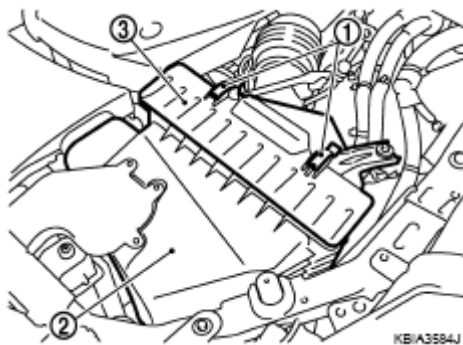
Identifying Clips, Holder And Air Cleaner Case
